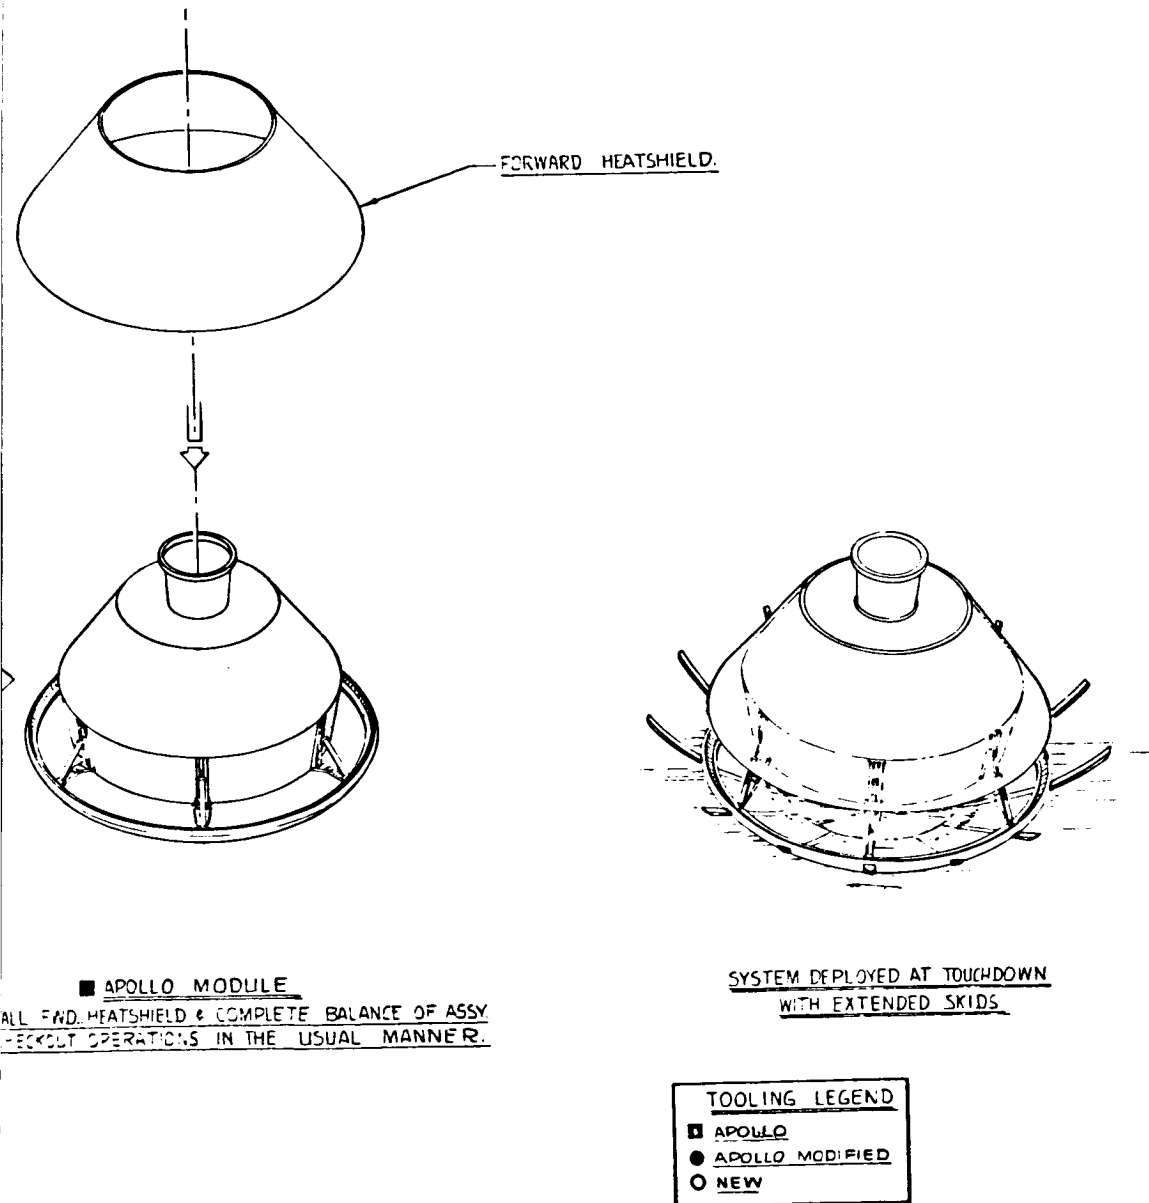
Manufacturing Breakdown, Deployable Heat Shield
